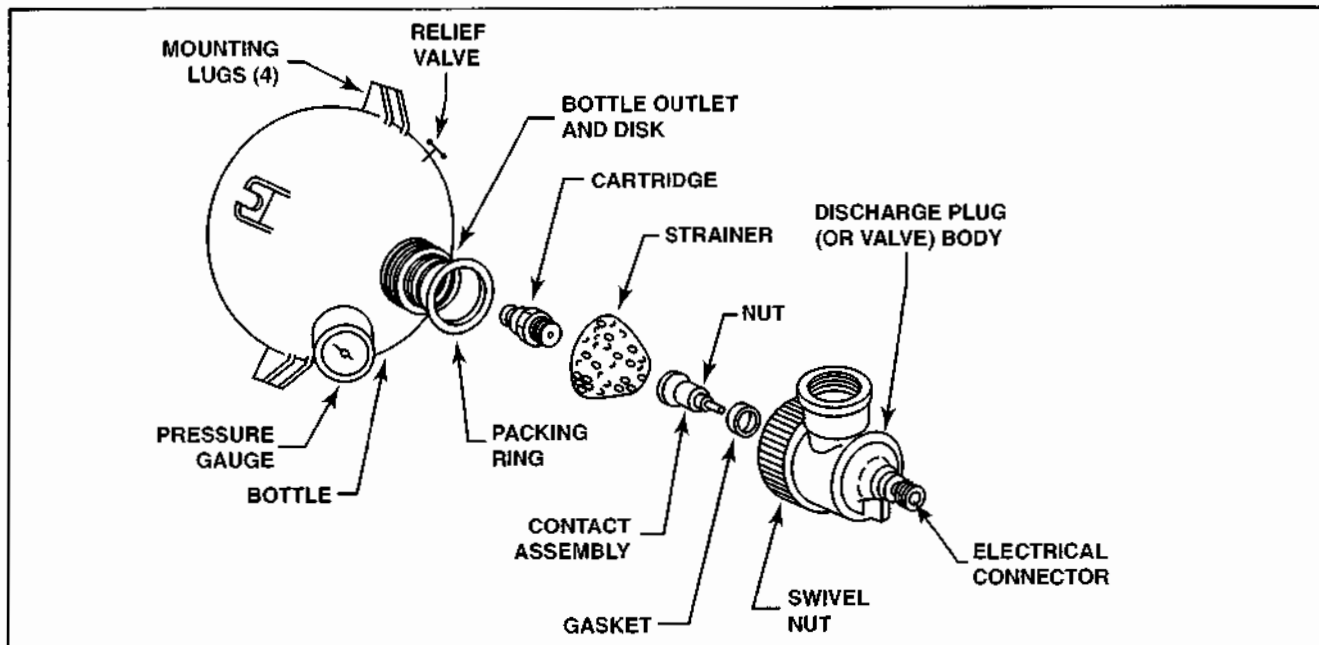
An exploded view drawing is useful when assembling a discharge cartridge into a bonnet assembly. After reassembly, the entire bonnet assembly is attached to the container with a swivel nut that tightens against a packing ring gasket.
